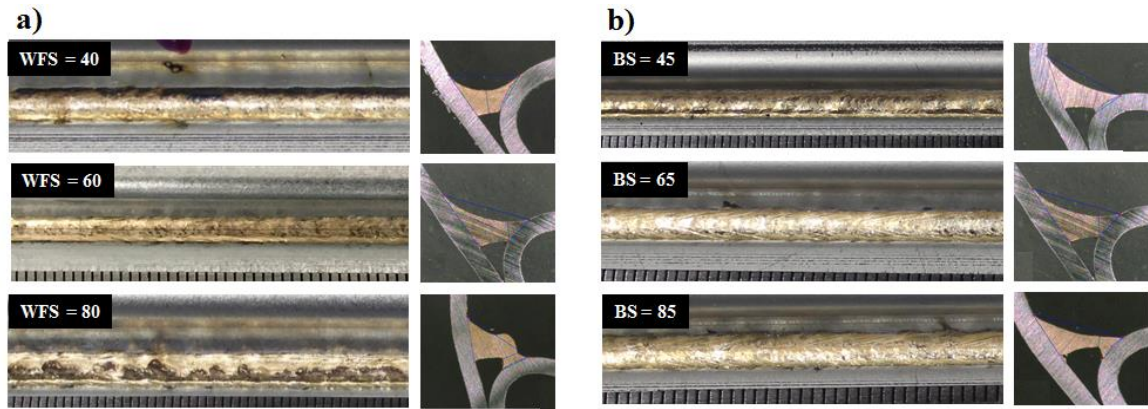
Surface appearances and cross-sectional images of laser brazed joints with LP=3.8 kW: (a) BS=65 mm/s, (b) WFS=60 mm/s.
